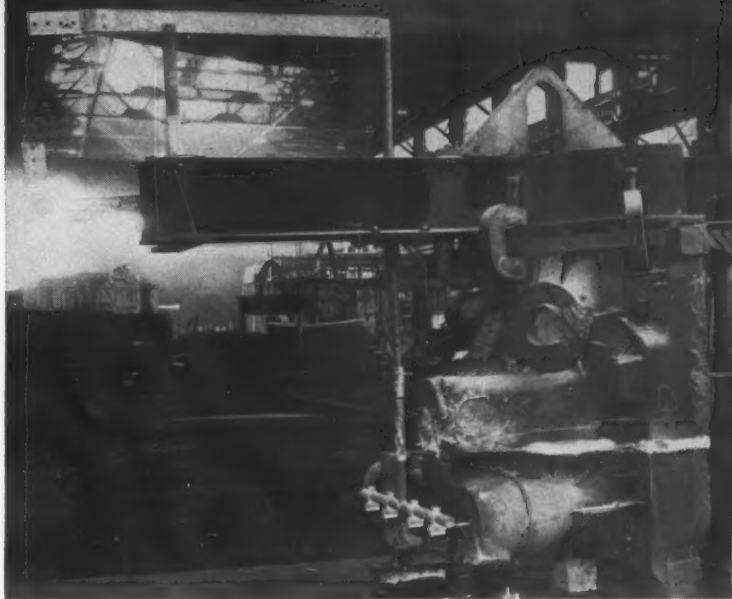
Steam turbine shell casting with lifting device and electrodes in place, after steam chest portion of casting was experimentally cleaned by electrolytic molten caustic method. Note surface conditions above and below line marking immersion depth.
